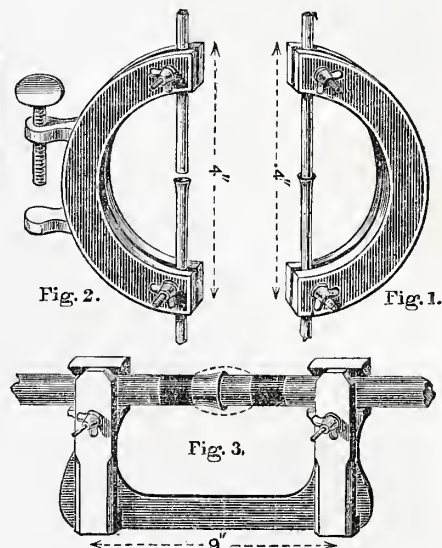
Tin and Composition Pipe Soldering Cramp. Fig. 2.—Ditto with Bench Screw, forming Gas-Fitters' Screwing Cramp. Fig. 3.—Ditto, Plumbers' Cramp.
